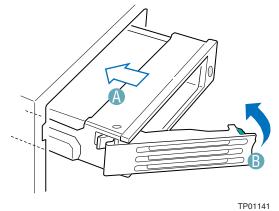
Installing Hot-swap Hard Drive Carriers into Chassis
